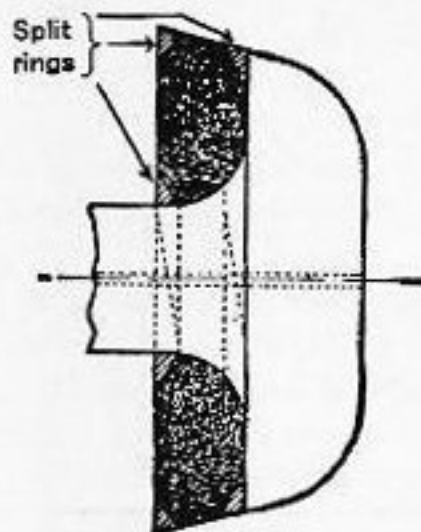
THE DE BANGE GAS CHECK—SHOWING SPLIT-RINGS.
